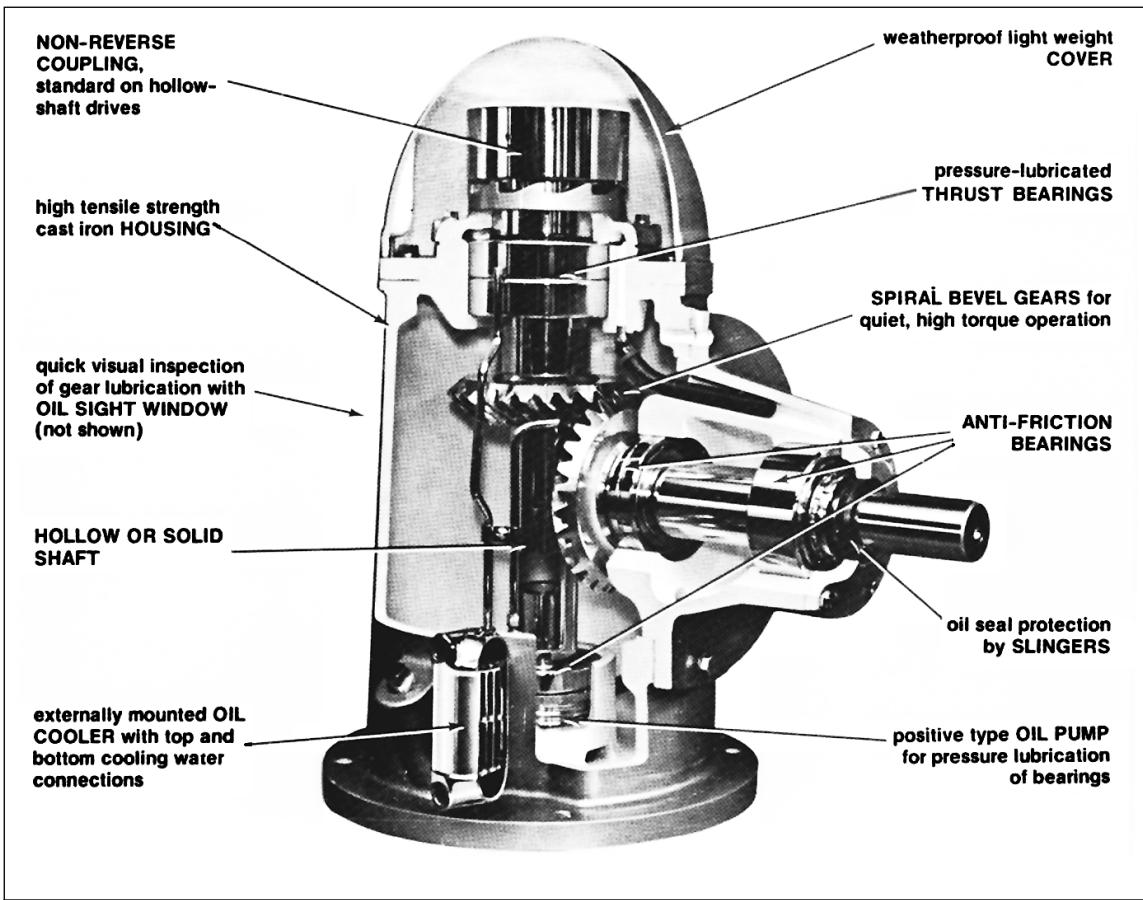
Right angle gear drive. (Johnson Gear, div. Of Arrow Gear Co.)
